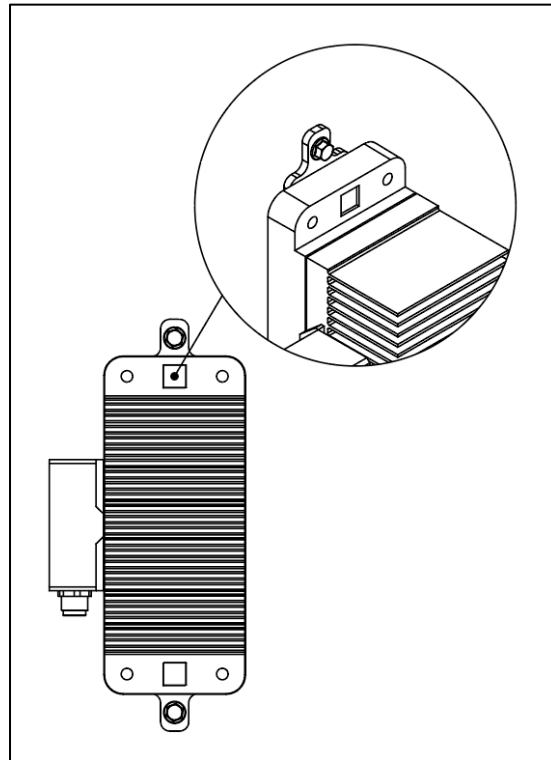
InduEye® TG Duo module - Flat mounting option with a screw
